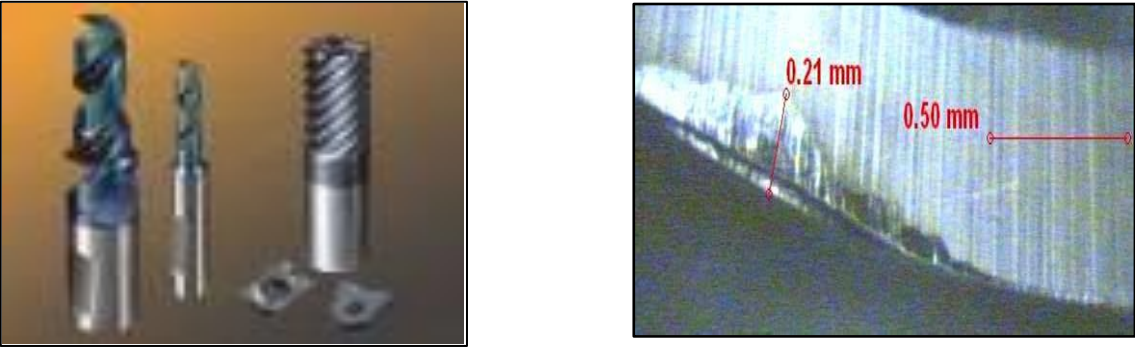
Cutters and Tools and a flank tool wear at cutting edge
